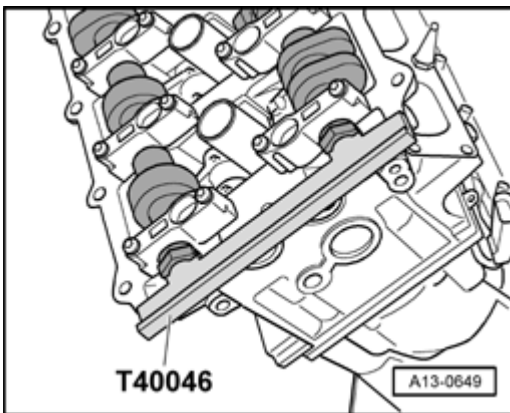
Removing/Inserting Camshaft Locator T40046 From/Into Camshafts Of Right Cylinder Head
